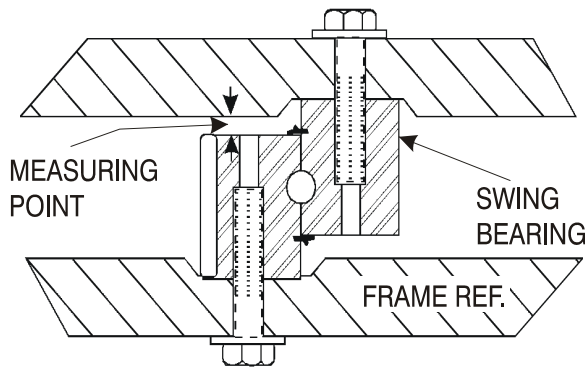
Swing Bearing Tolerance Boom Placement
